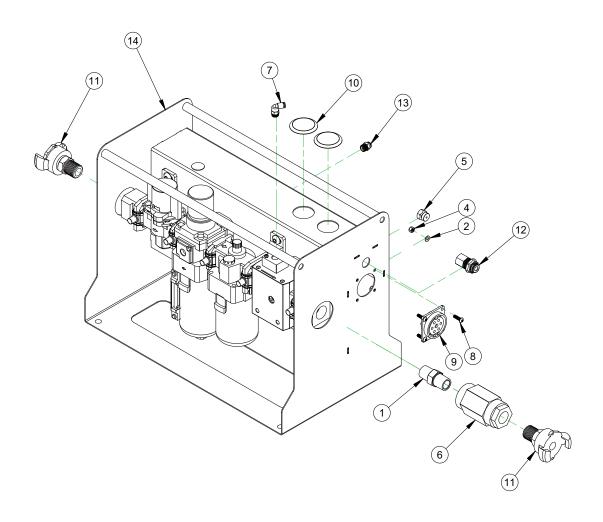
OPERATOR PENDANT ASSEMBLY 1 (P/N 96374)
